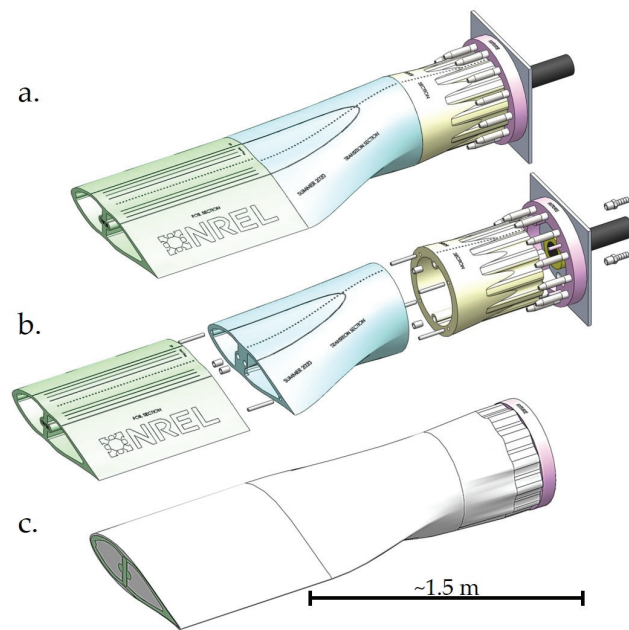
Full assembly drawings of the blade section mold, where (a) is fully assembled, (b) is exploded to show the connections between sections, and (c) includes the composite overlay.
